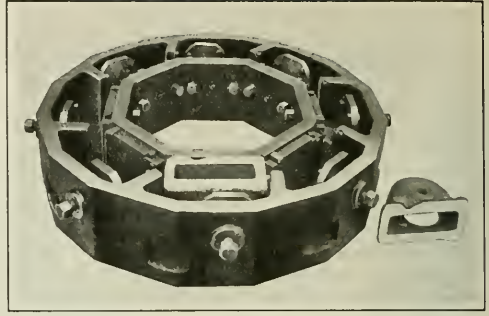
Fixture designed for holding Covers for Pump Gear-cases
